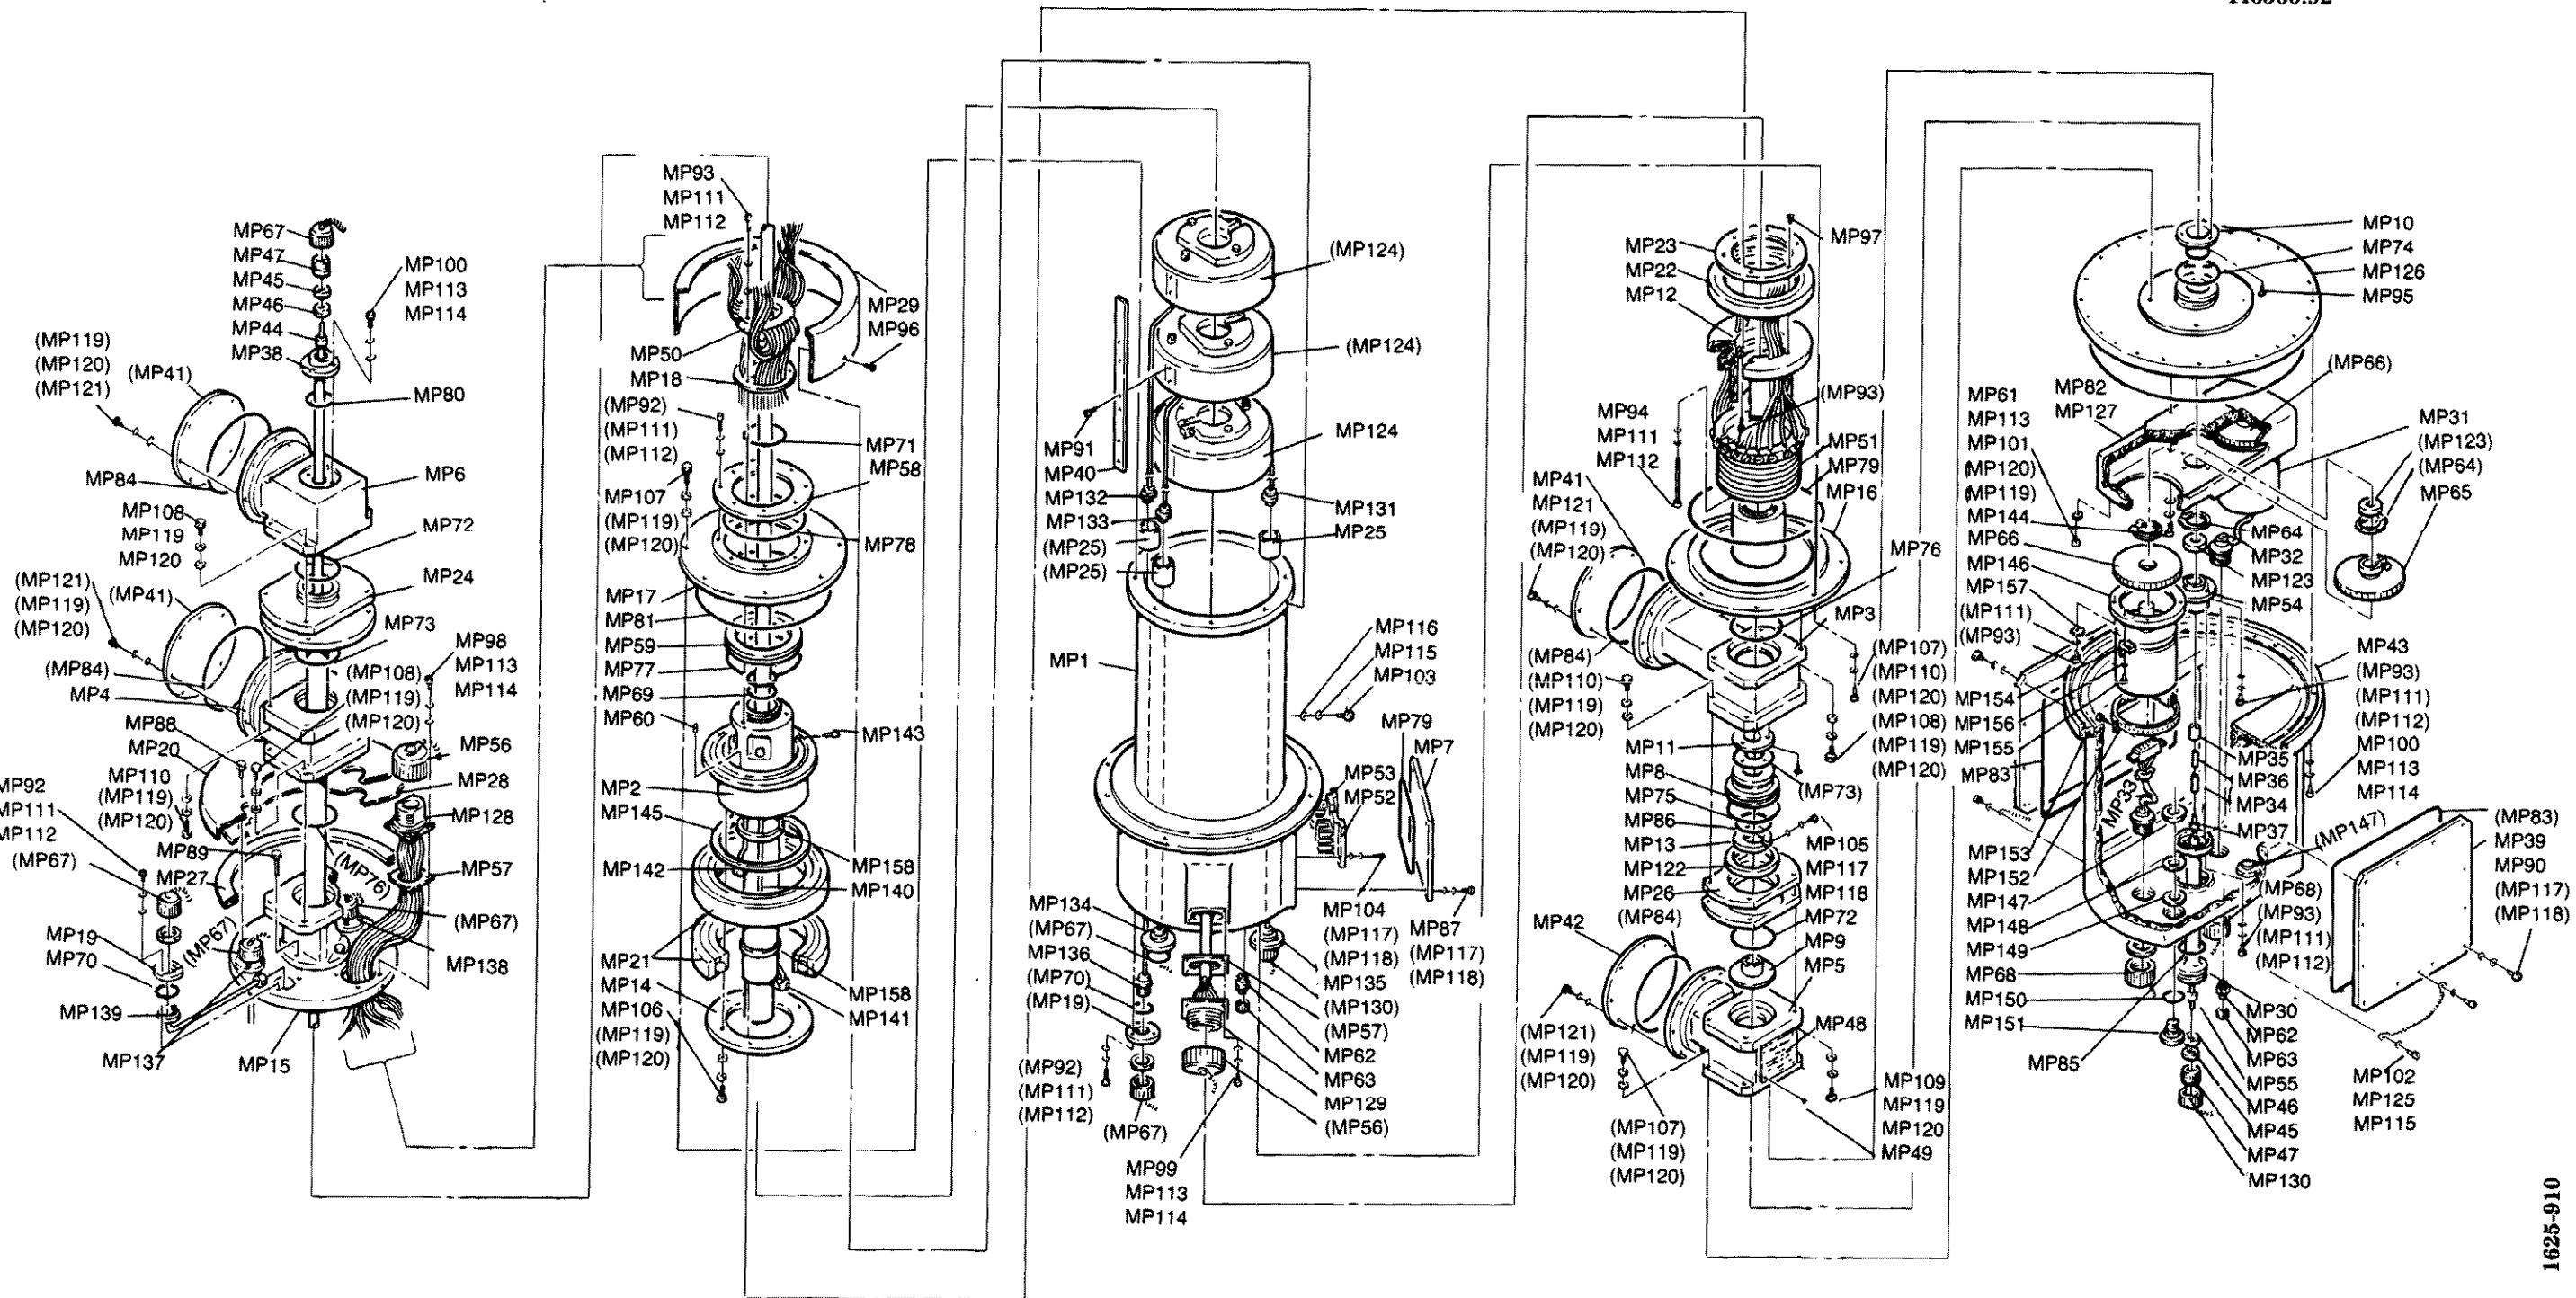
SIX PATH ROTARY JOINT PARTS LOCATION
